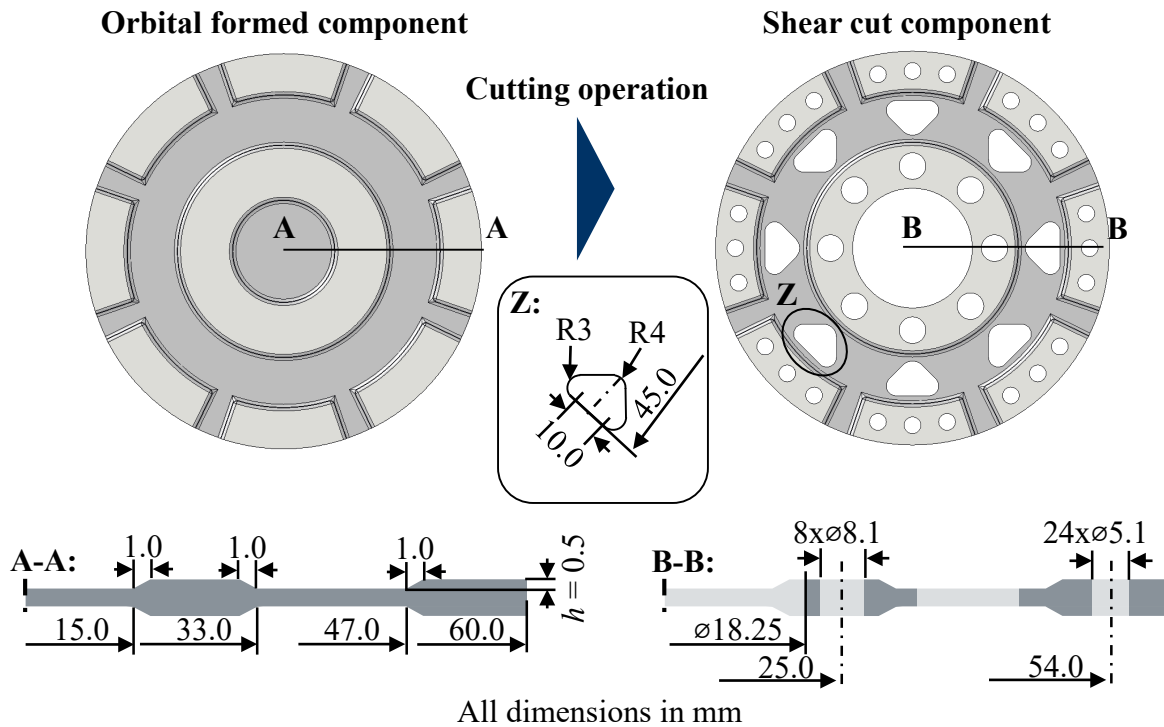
Geometrical dimensions of the component after orbital forming and cutting
